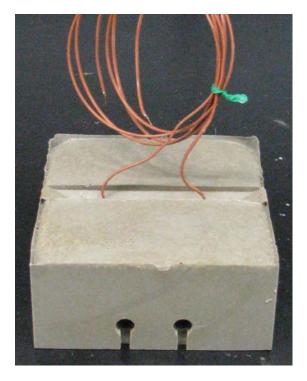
Epoxy Mould Cavity with Embedded Thermocouples
